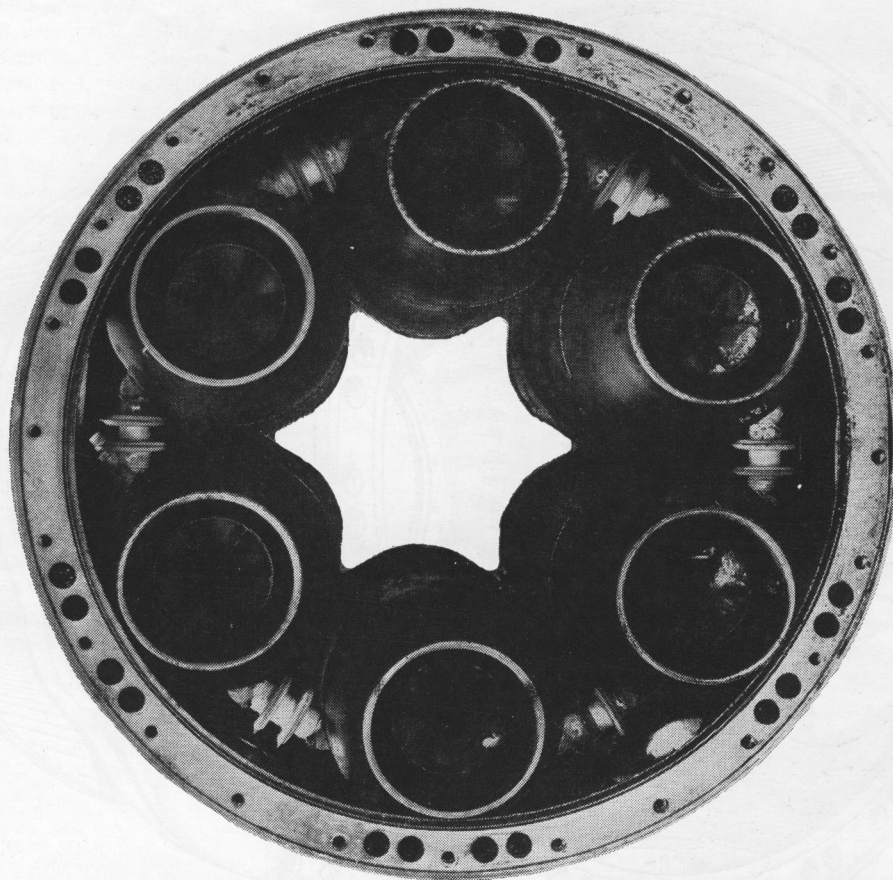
Front view of a combustion chamber casing with combustion chambers and ignition interconnectors and plugs in place. Every other chamber has an ignition plug.
